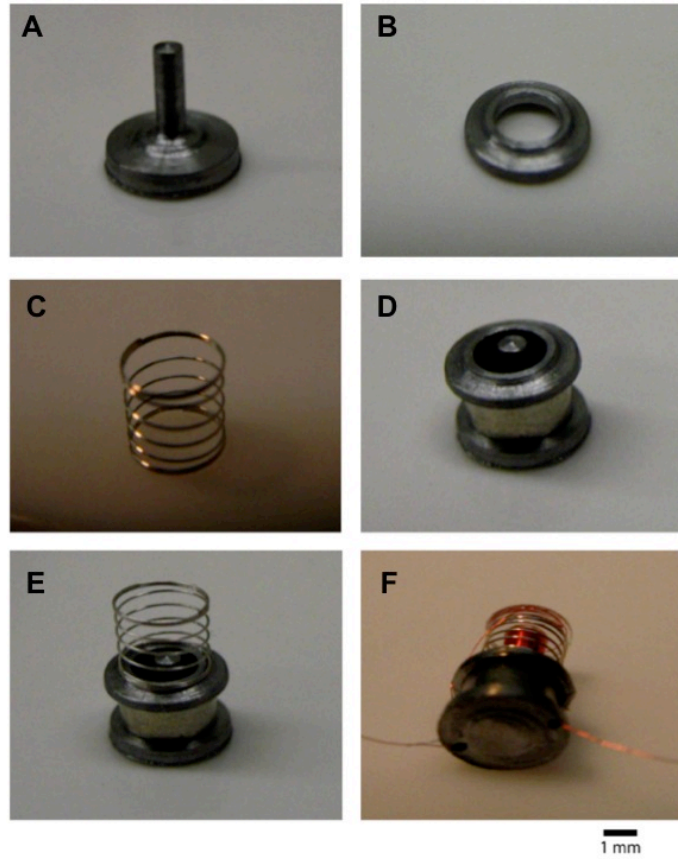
DHD actuator components a) inner flux guide b) outer flux guide c) spring d) inner flux guide, permanent magnet, and outer flux guide assembly e) assembly in part d with spring added f) fully assembled actuator with micro holes drilled in the outer and inner flux guides to allow for the voice coil leads to be protected during operation
